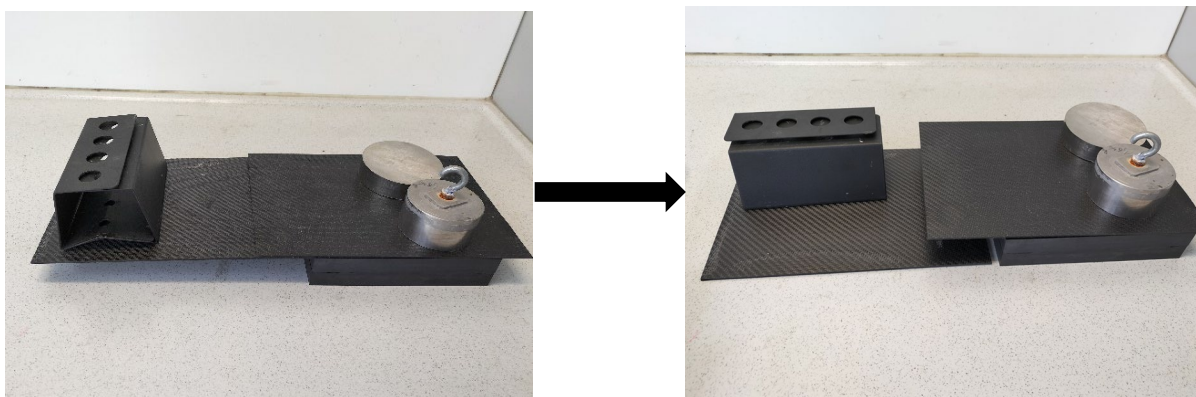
1) Welded PA carbon composites => 2) after debonding
